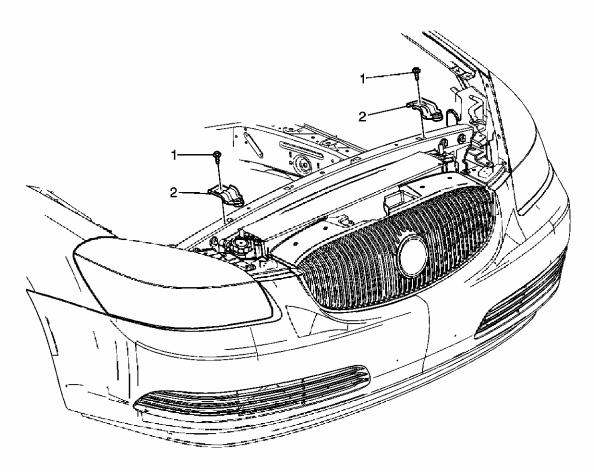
Locating Radiator Support Bracket Courtesy of GENERAL MOTORS CORP.
